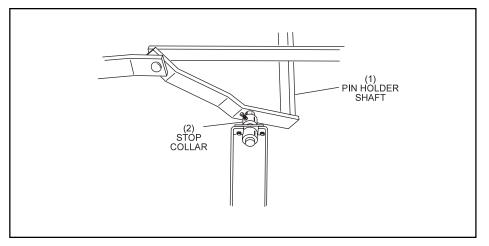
Adjusting an Entire Row of Pin Holders.
